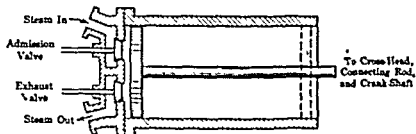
Conventional Steam Cylinder and Valve Head.
